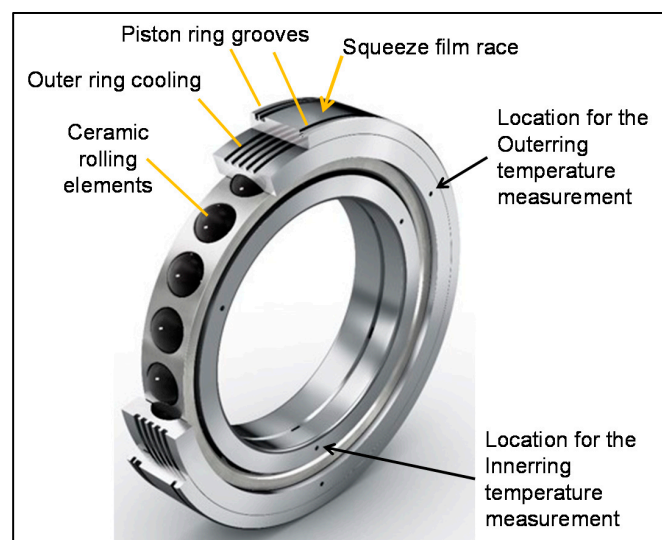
Details of the hybrid bearing arrangement with outer ring cooling and squeeze film damping.
